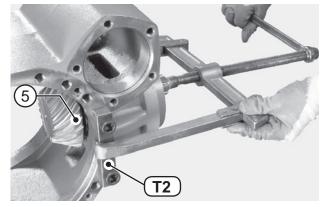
Apply blocks T2 (See drawing T2 p. 91) and, with the help of a puller, extract the pinion (5) complete with the internal bearing (6), the spacer (8), and calibrated spacer (4, 7).
